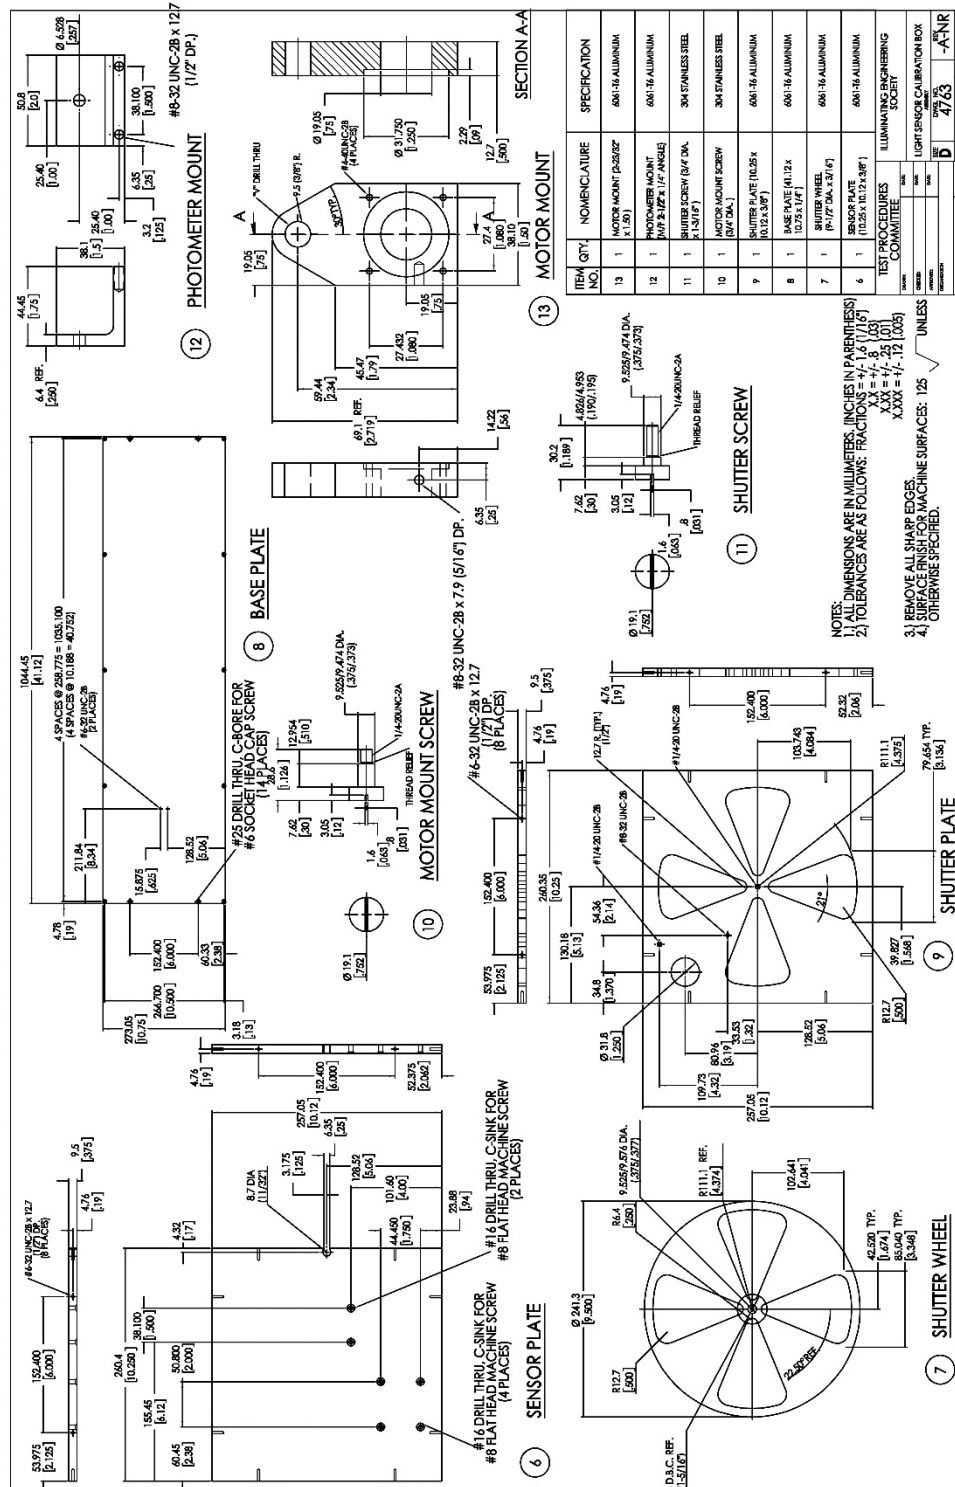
Mechanical specifications for the sensor plate, shutter wheel, base plate, shutter plate, motor mount screw, shutter screw, photometer mount, and motor mount that are part of the test box, with an associated materials list.
